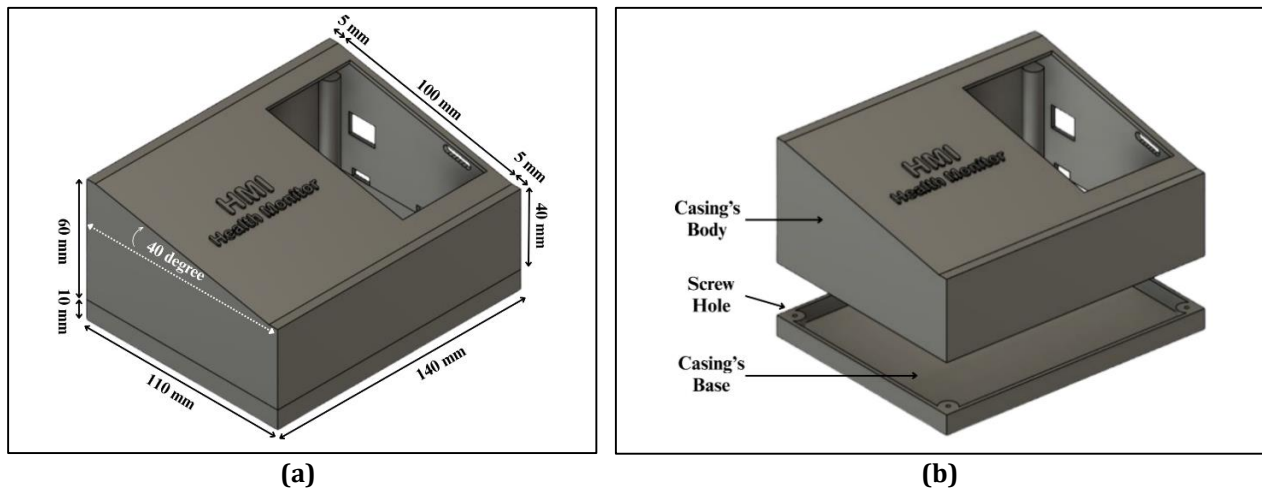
3D Casing Design using Autodesk Fusion 360, (a) Final Design Dimensions, (b) Exploded View
